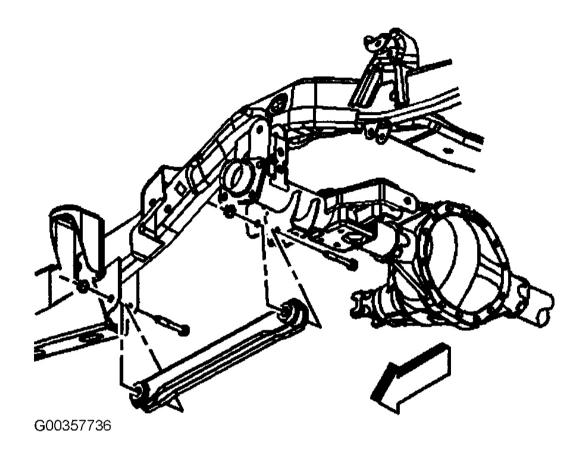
Removing Lower Control Arm Retaining Nuts & Bolts Courtesy of GENERAL MOTORS CORP.
